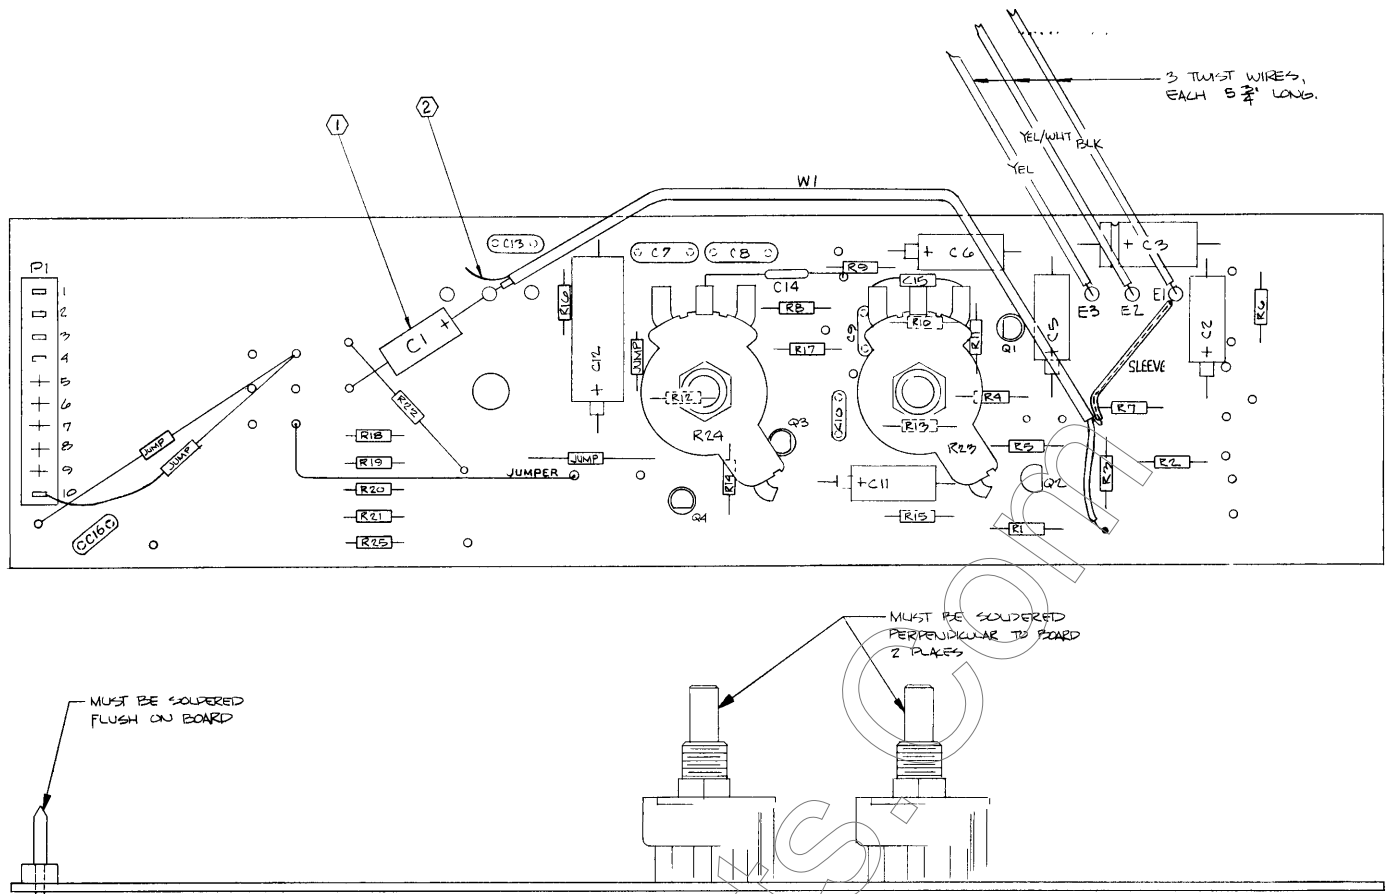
Electronic Part Locations (2D912-8), Preamp PCB Assembly
